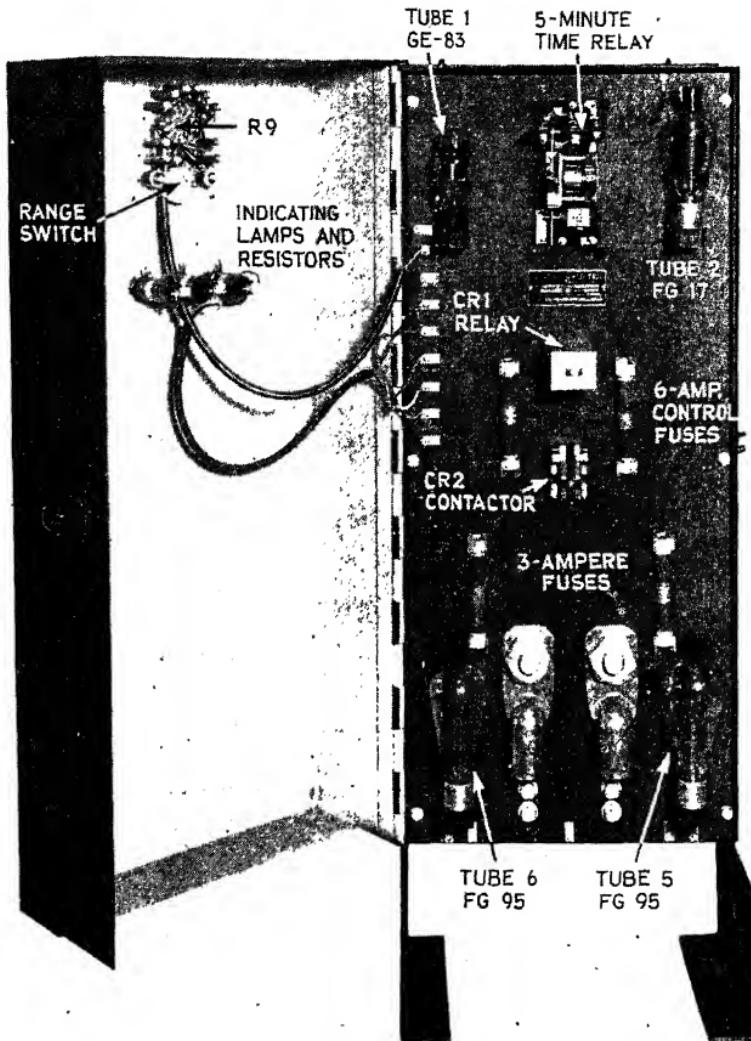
B.—Synchronous spot-welding control (front door open).
